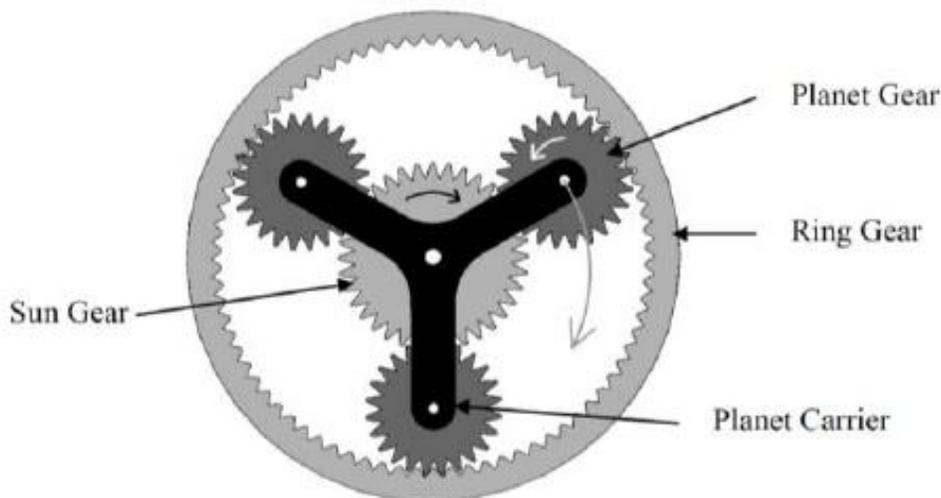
Dynamics of a planet driven system. The sun gear is driving, ring gear is fixed, and the planet carrier is the output that rotates [1].
